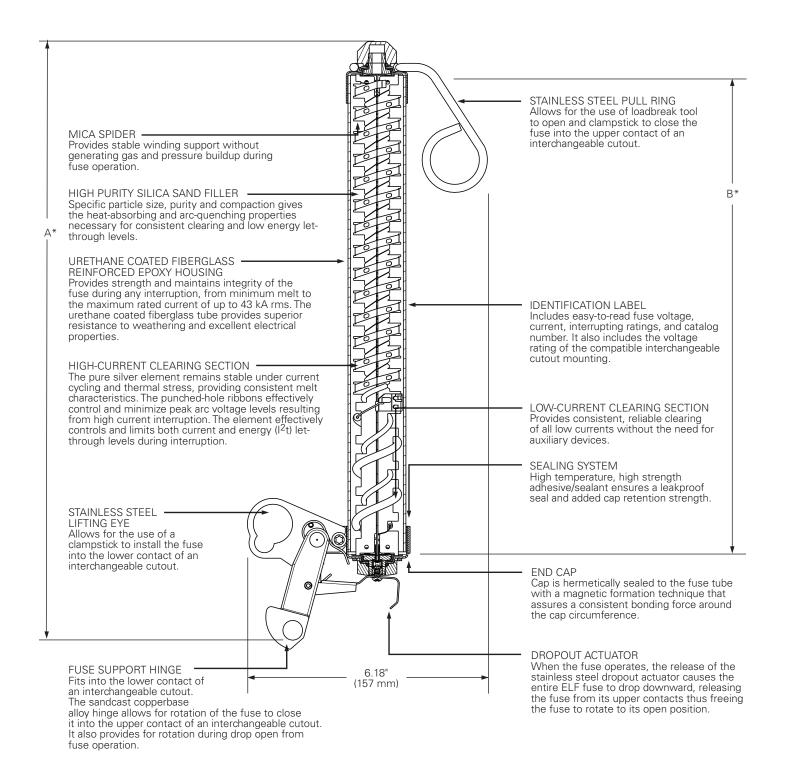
Line illustration of single-barrel ELF fuse cutaway with dimensions.
